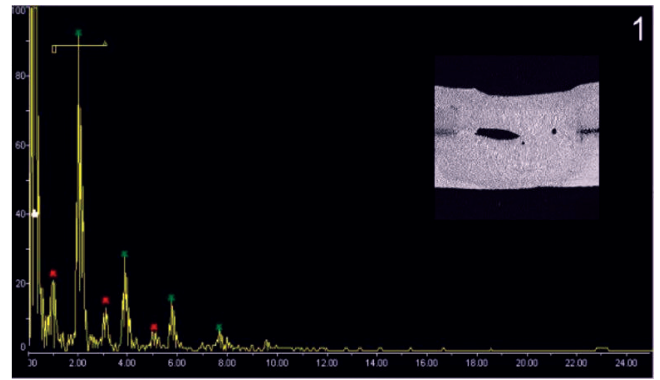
The view of the flaw detector screen and the metallographic section of the weld nugget with defects
